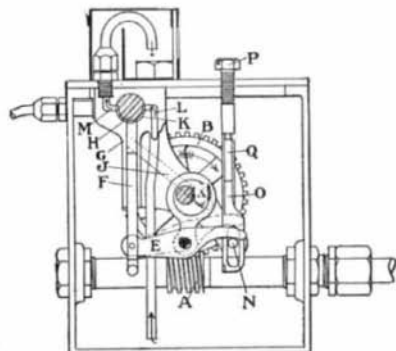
DOUBLE PUMP LUBRICATOR WITH ROTARY VALVE.
